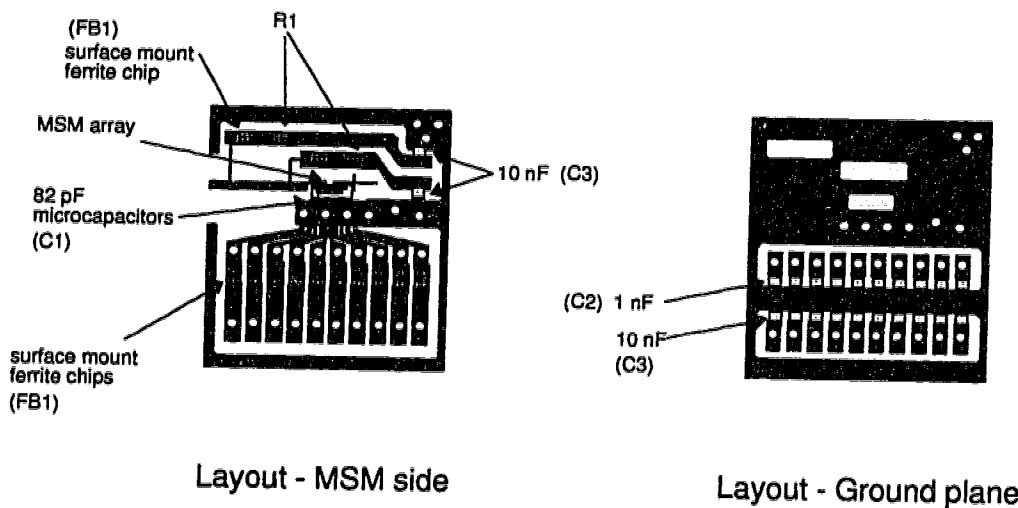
Schematic view of optoelectronic module on circuit card (the fibre bundle terminates in the v-groove fibre holder shown in Fig. 3.4)
